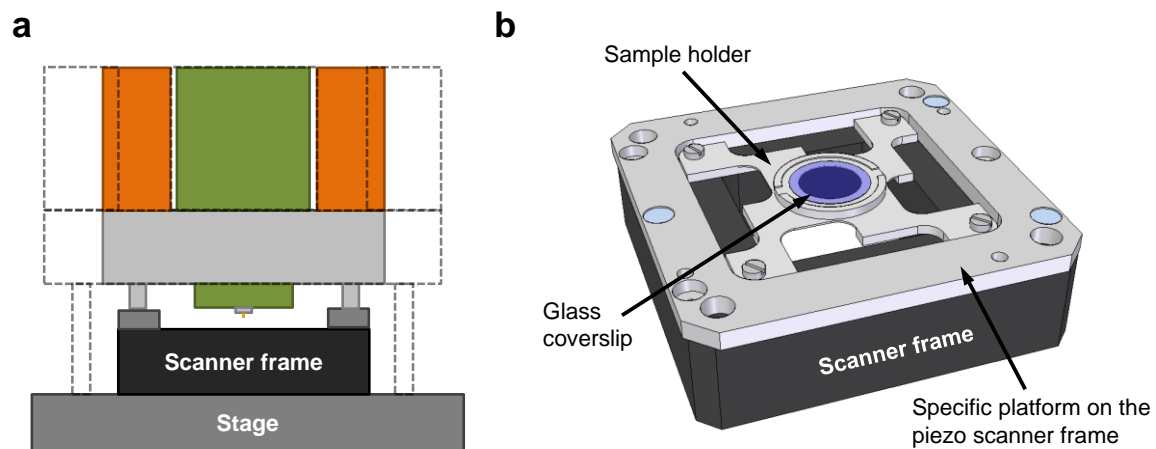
a) Minimization of the mechanical loop. Dashed lines: design if the head was to be placed on the stage. Solid: design to minimize the mechanical loop. b) 3D render of the piezo scanner assembly showing its different parts.
